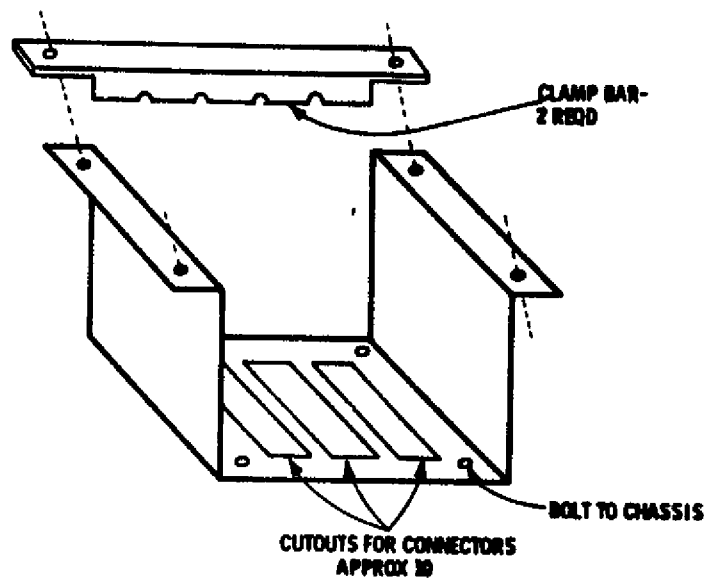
Circuit Card Edge Clamping Assembly
